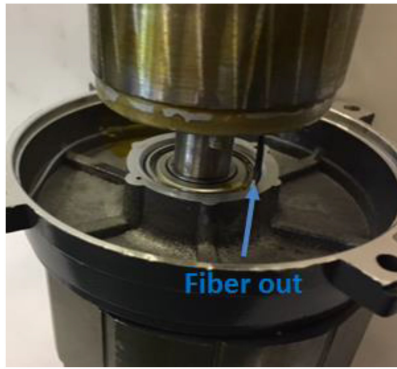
End-cap housing installed bearing embedded with the sensor array.
